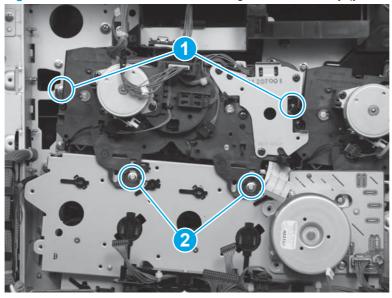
Remove the toner-cartridge drive assembly (yellow and magenta)
